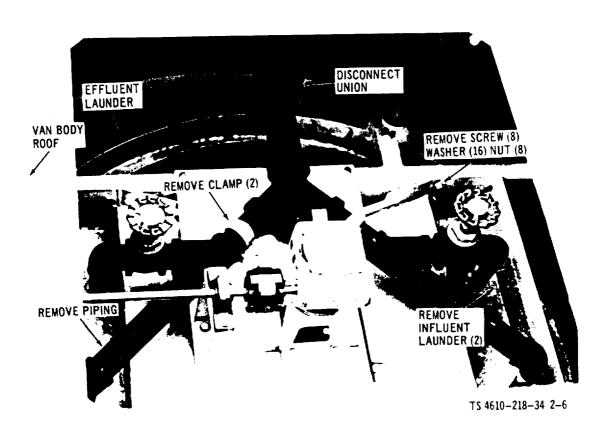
Aspirator Manifold Assembly, Removal and Installation
